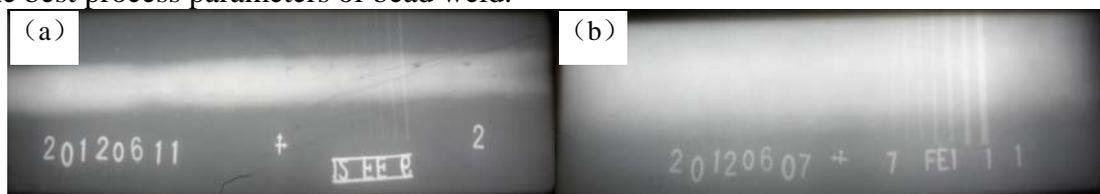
Weld internal quality of 20mm and 40mm thickness plates: (a) 20mm, (b)40mm.
